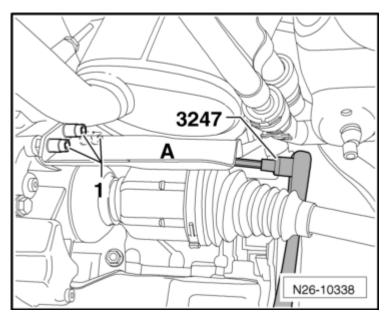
Identifying, Tool -3247-, Bolts -1- And Heat Shield -A-
